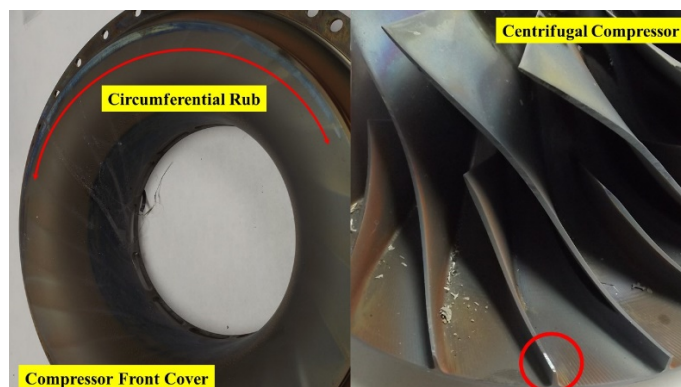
NO. 2 ENGINE CENTRIFUGAL COMPRESSOR CONTACT WEAR
